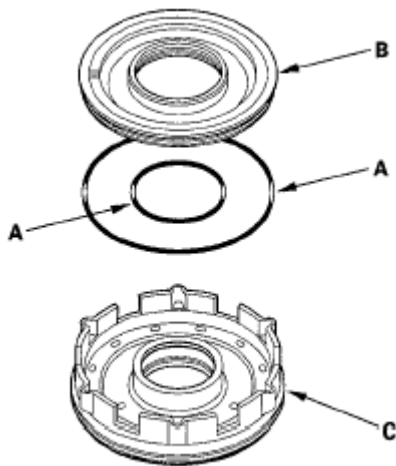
Identifying O-Rings, 1st-Hold Clutch Piston And 1st Clutch Piston
